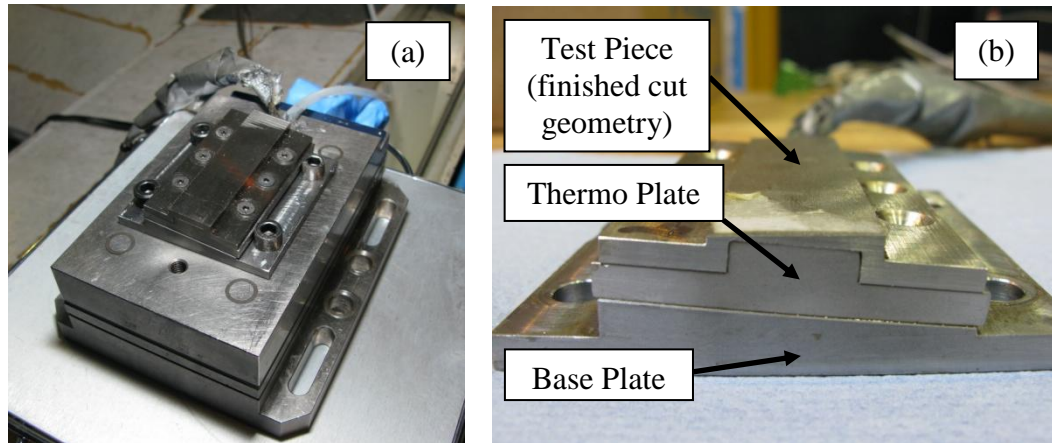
Image of the final test piece assembly; (a) View with test piece assembly placed on dynamometer, (b) End view detailing separate parts of assembly.
